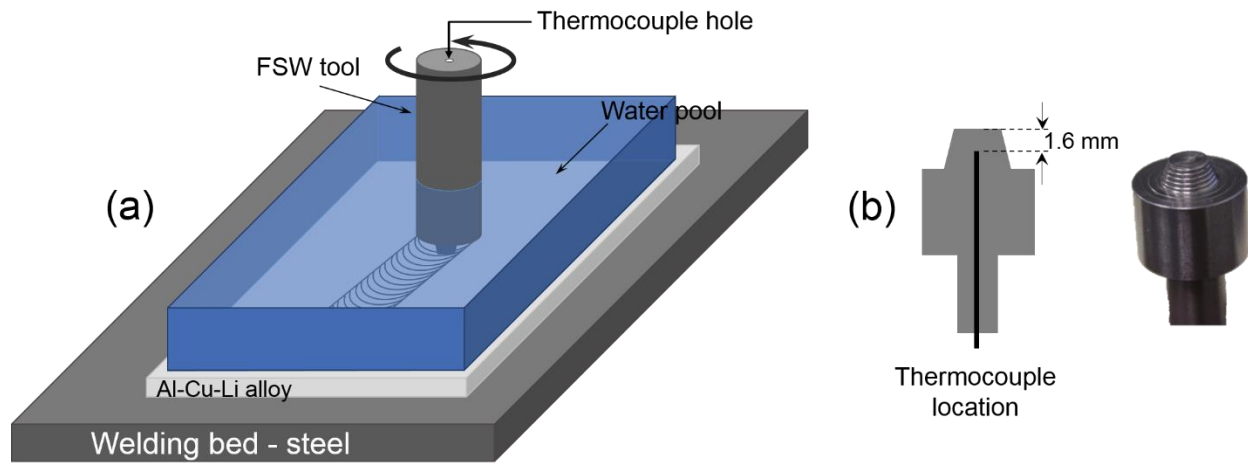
Schematic of welding setup used in UWFSW and (b) schematic of thermocouple location inside the tool with an image of actual tool used in all the welds.
